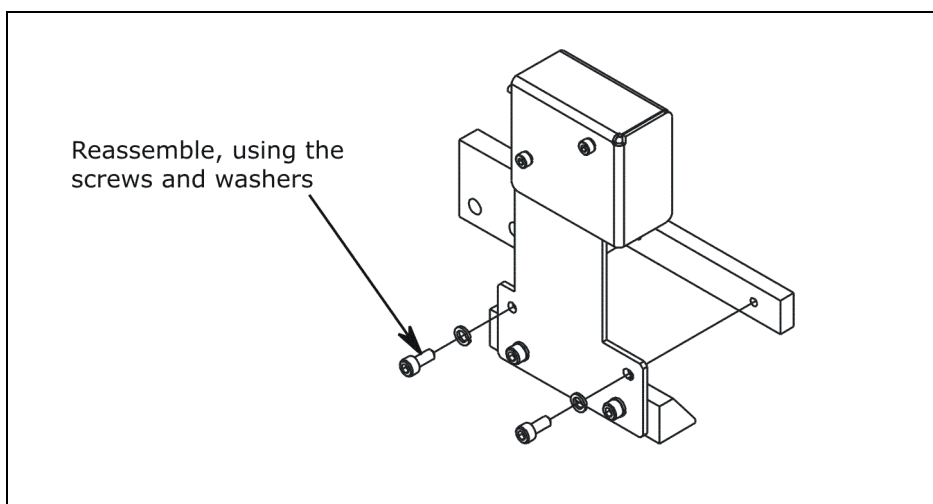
Setting the Dipswitch and Attaching the Cable Hardware
